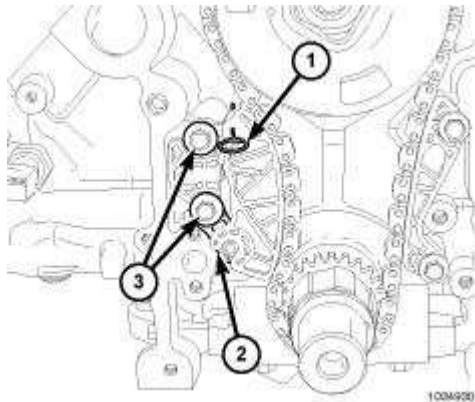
Timing Chain Tensioner, Pin & Bolts
